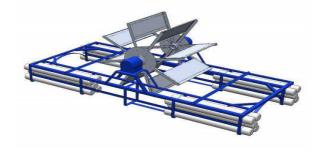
Floating waterwheel with supporting PVC pipes on sides.
